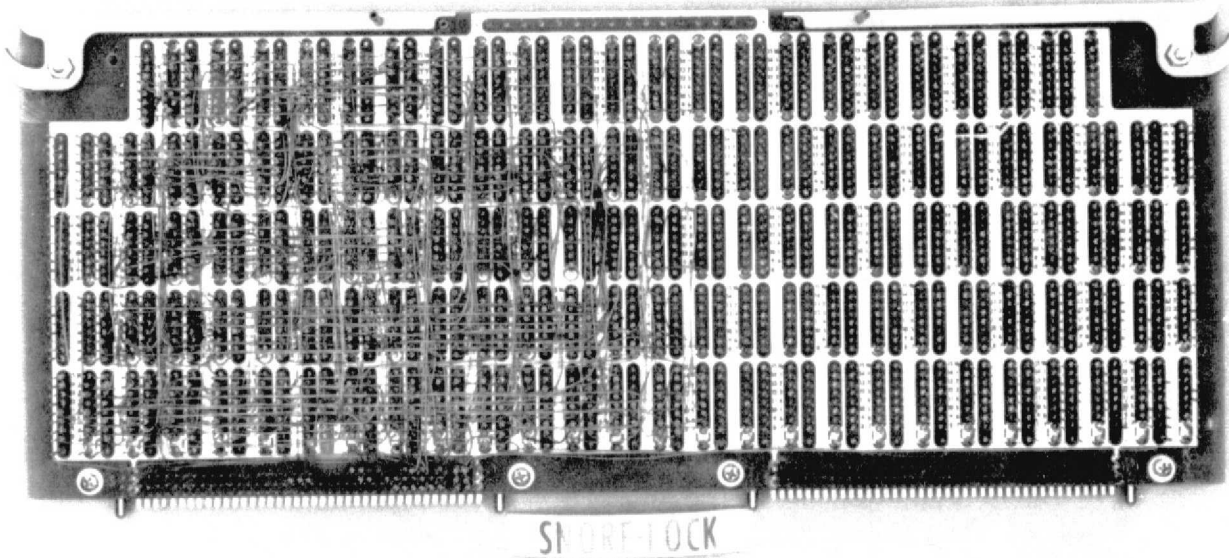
Wiring side of SNORE-LOCK wire-wrap card
